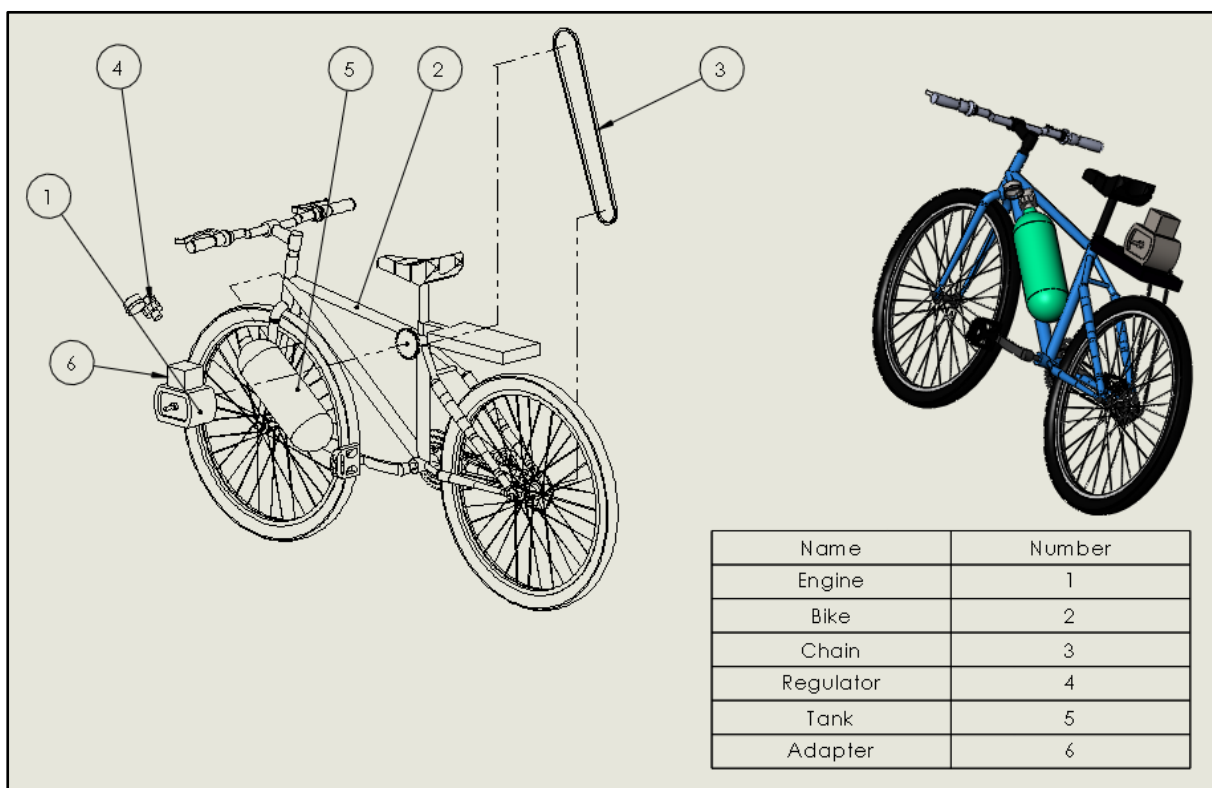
CAD of the Bicycle with the Pneumatic Burst System
